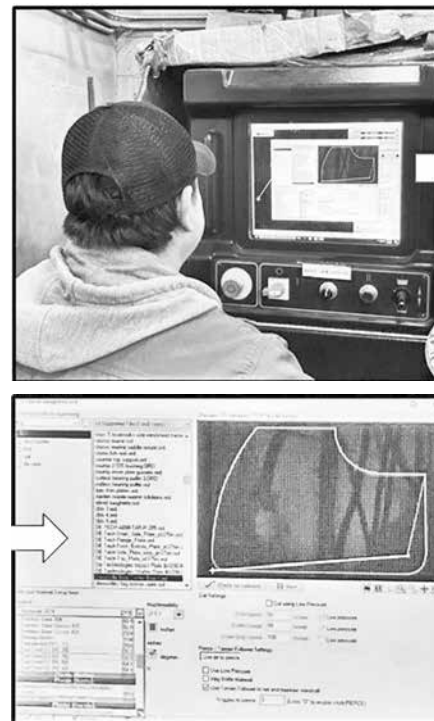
ACW engineers utilized 21st century tech to design and fabricate the centerboard.
